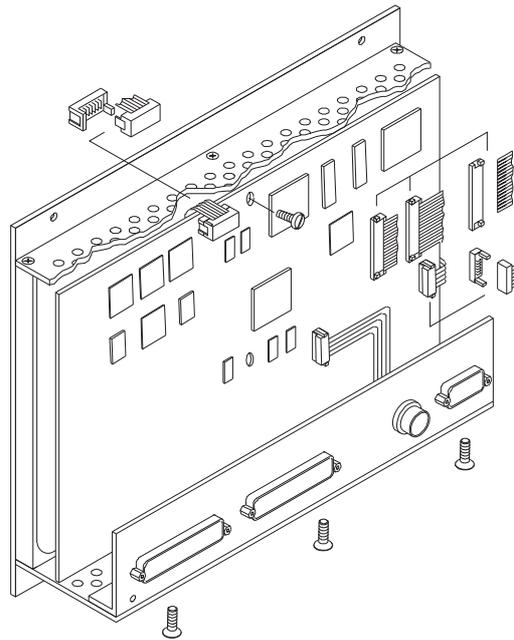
Loosening the mounting unit of main pcb and connector panel
